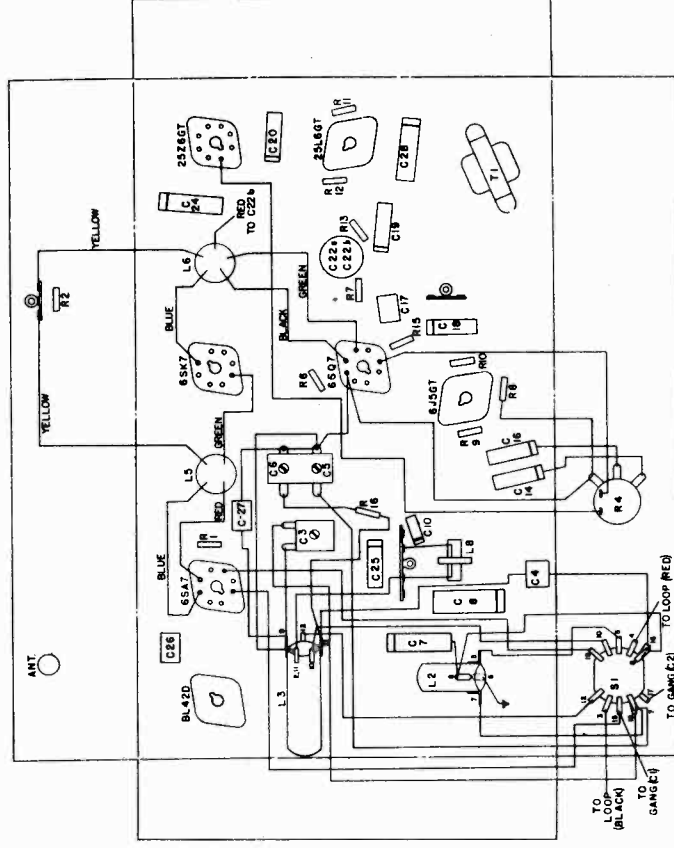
Chassis Parts Layout Models H-630, -631, -632, -633 (Early)
